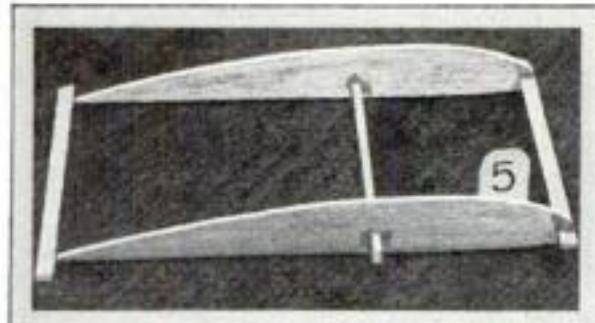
This type of wing rib is strong but should be avoided because it is too heavy.
